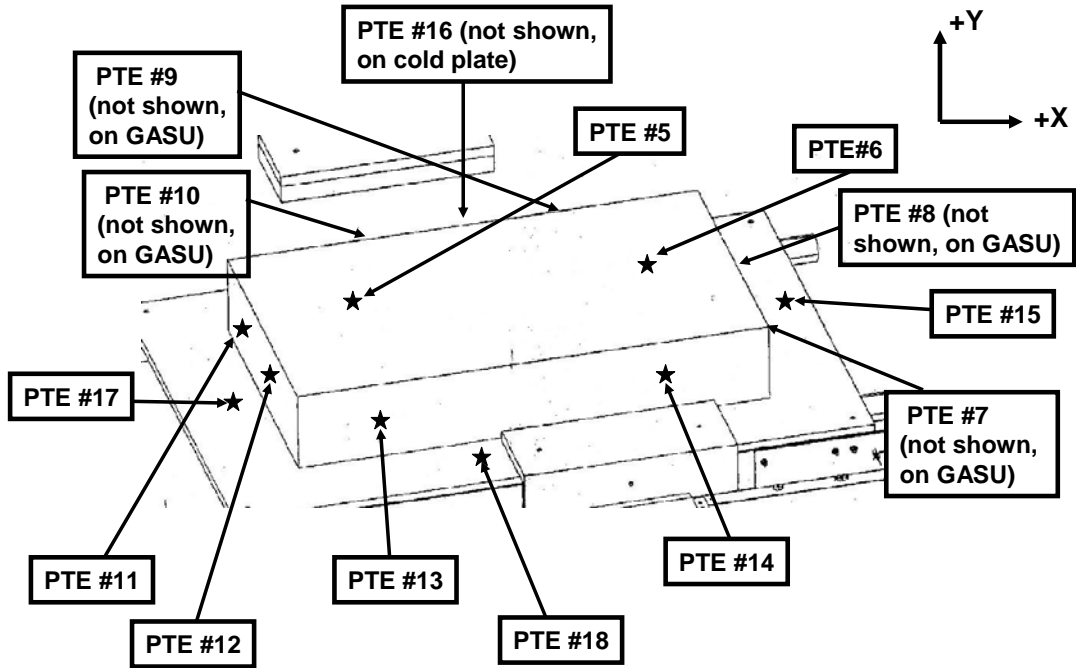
GASU and GASU Cold Plate Thermocouples
